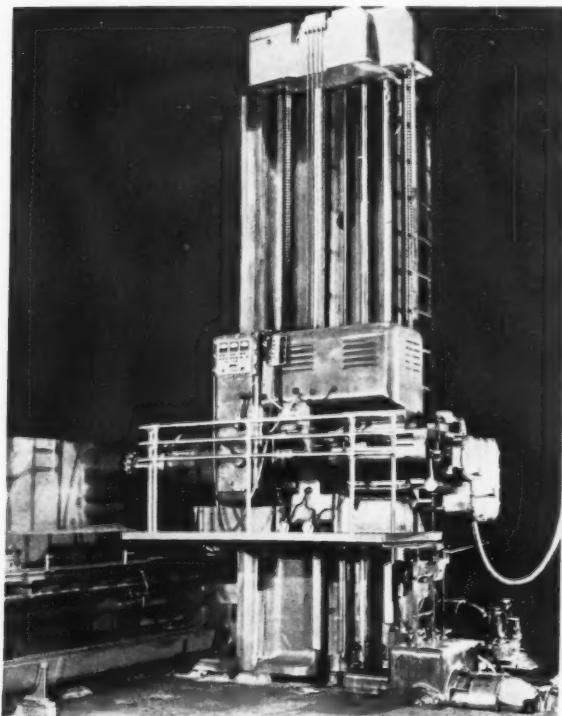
Special and geared head motors on large milling machine make its operation precise and its control easy
